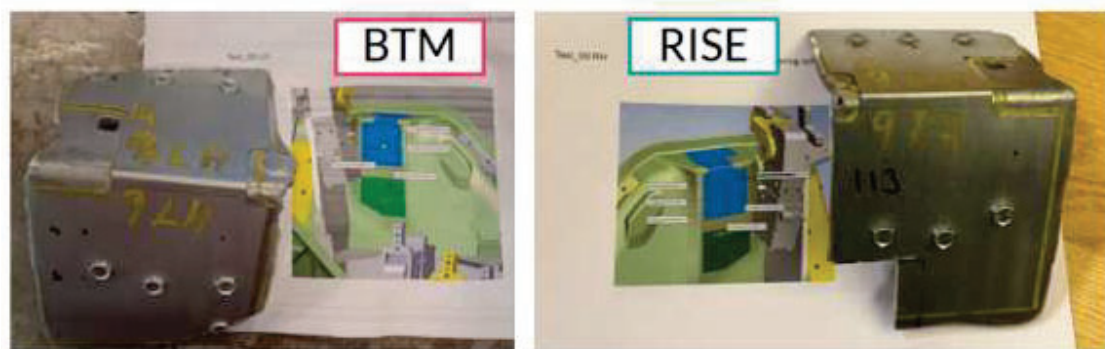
Soft tool floor samples used for disassembly and re-assembly
